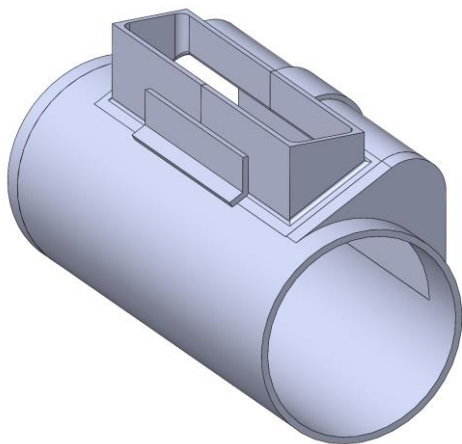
Main housing assembly front. The circular opening for the main axle is shown. The inlet can be seen at the top.
